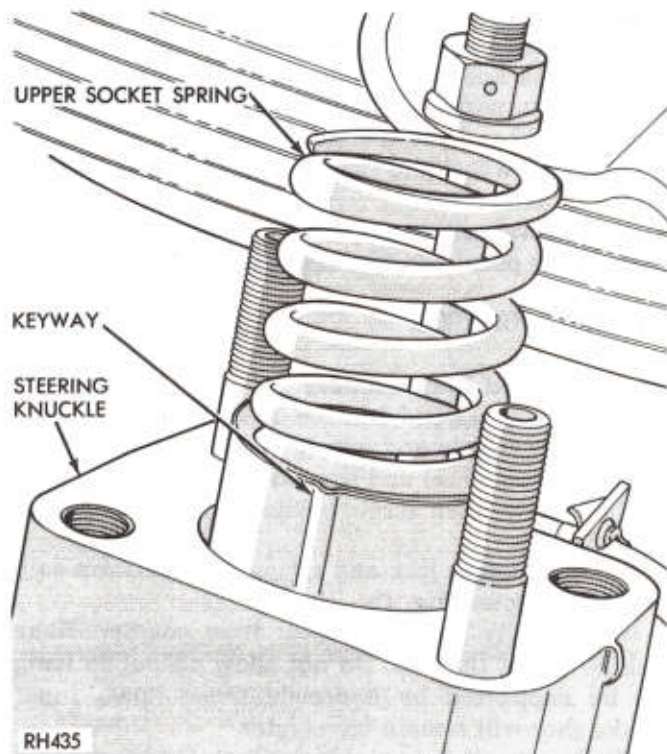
Proper Alignment of Keyway on Sleeve to Steering Knuckle
